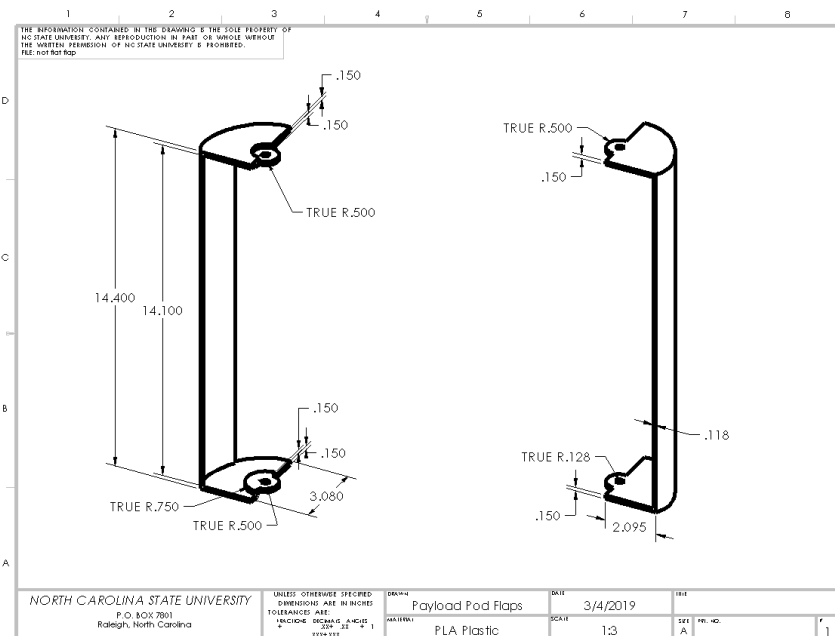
Dimensioned Drawing of Both Payload Pod Flaps
